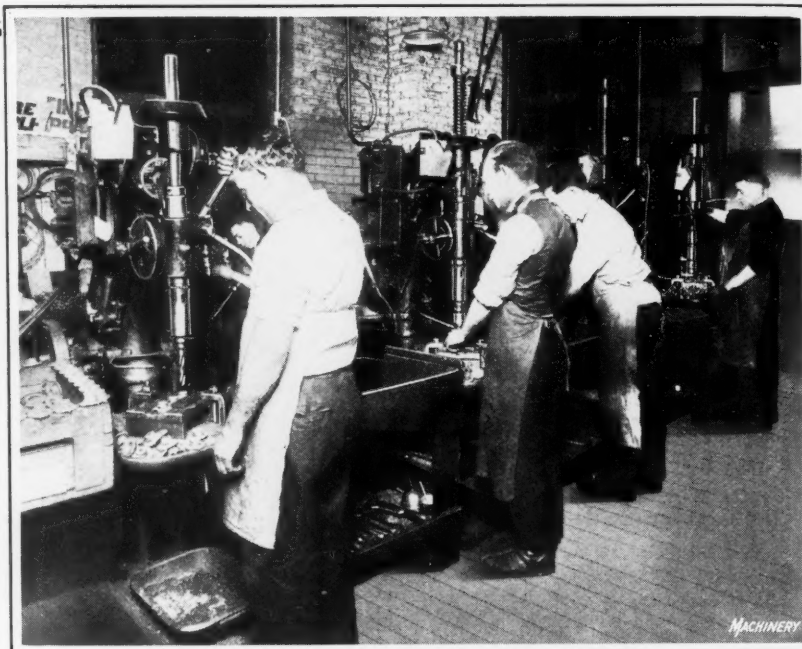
Three Drilling Machines and a Tapping Machine grouped to obtain High Production Rates on a Small Flanged Part
